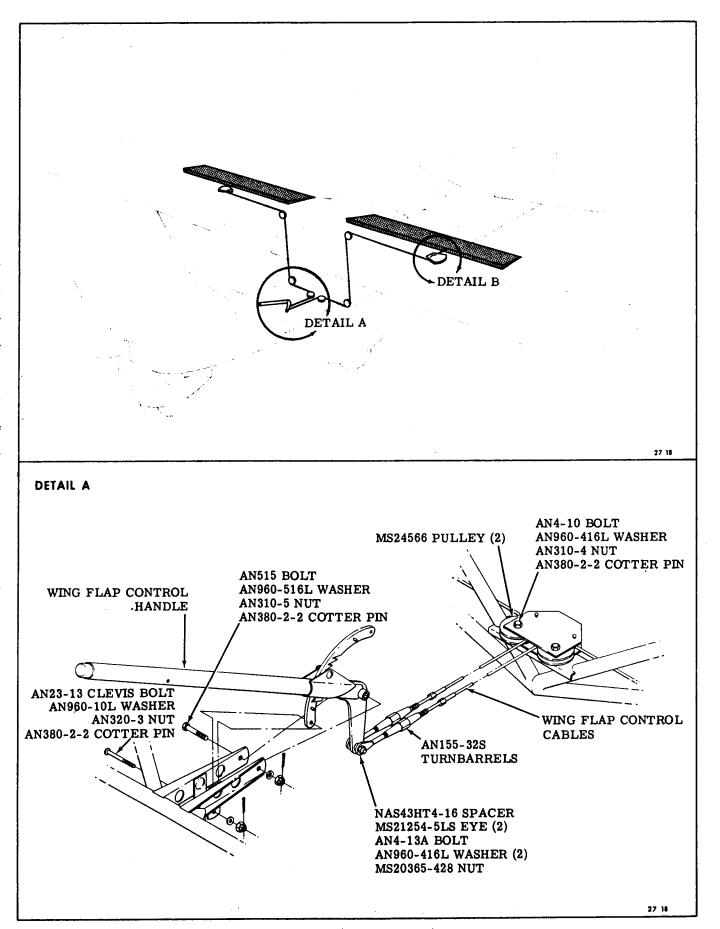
Wing Flap Control System (Sheet 1 of 2)
